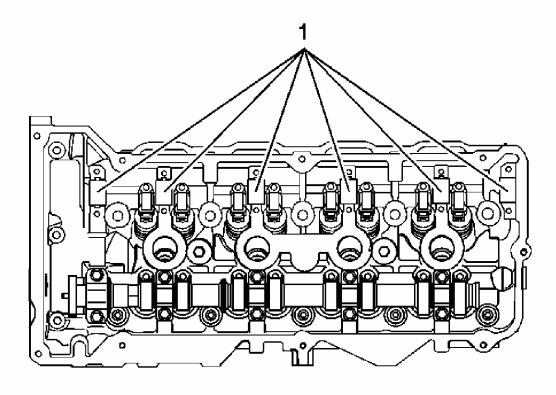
View of Camshaft Journals Courtesy of GENERAL MOTORS CORP.
